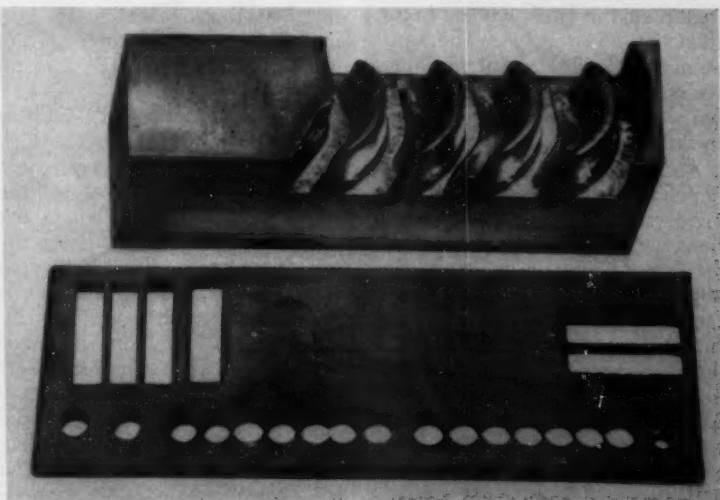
(Top) Turbine blades for rocket motors and small gas turbines integrally formed in Udimet 500 material by Anocut electrolytic cavity-sinking machine. (Bottom) Test strip of zirconium alloy with holes cut to size within close limits by the machine illustrated in Fig. 1
